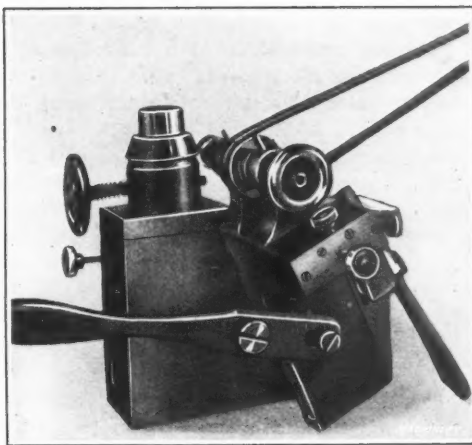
Machine and Fixture used to mark Lighting Line on Fuse Rings
